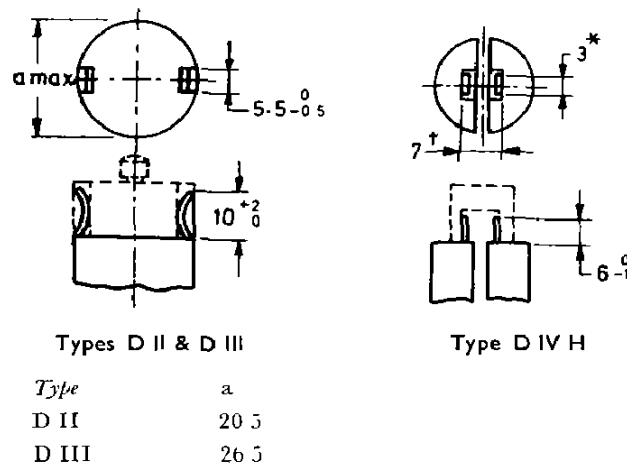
HAND-KEY FOR GAUGE-PIECE
